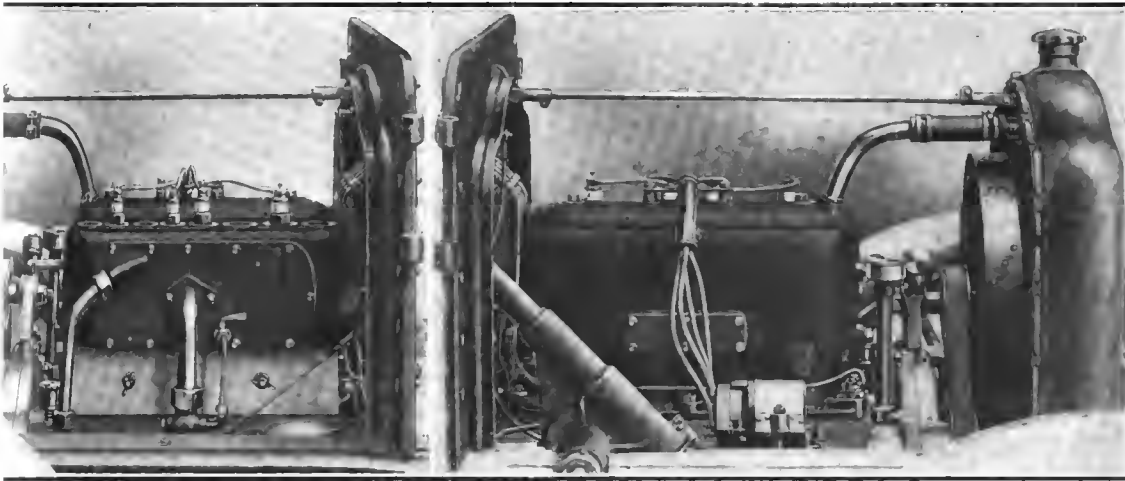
Right side of motor showing water connections, spark plugs, and freedom from complication. Fig. 2—Right side of motor showing magneto, simple and secure method of holding the high-tension wiring system, and how the steering post is fastened to the shaft passing out above the line of the frame.
